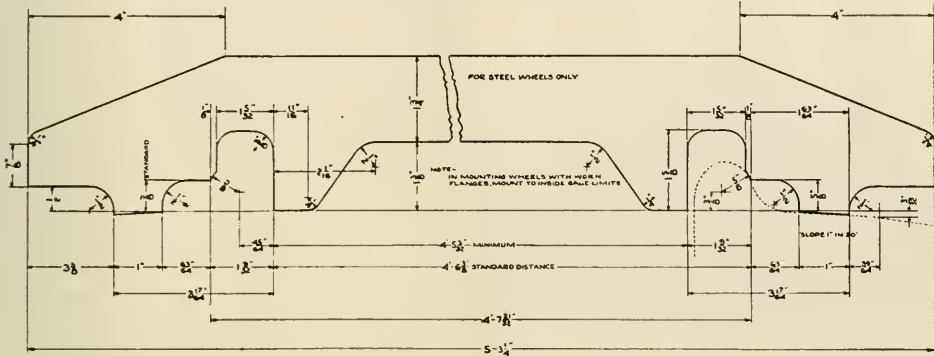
Flange and Spacer Gage for Re-Mounting Wheels
